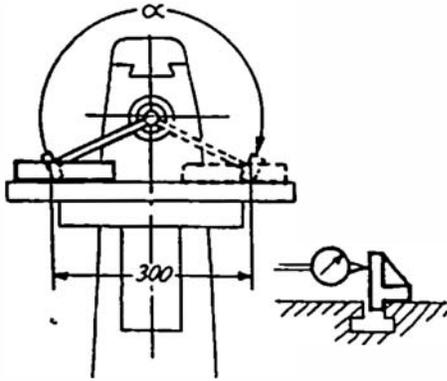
Perpendicularity between the Centre T-slot and the Spindle
